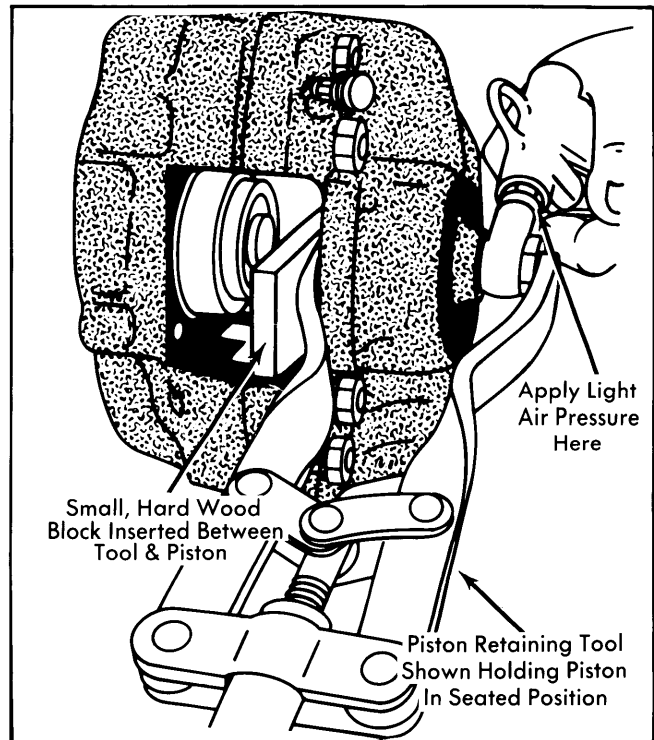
Using Air Pressure to Remove 911SC Caliper Piston
